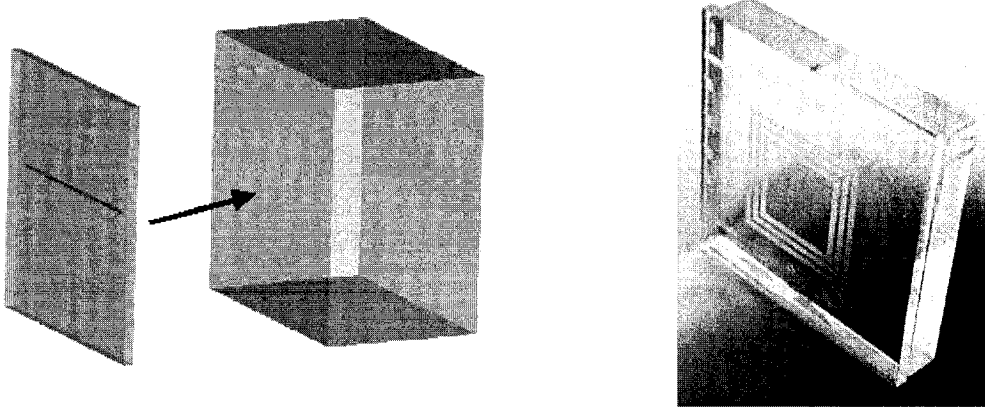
Illustration (left) and photograph (right) of the first assembly step
